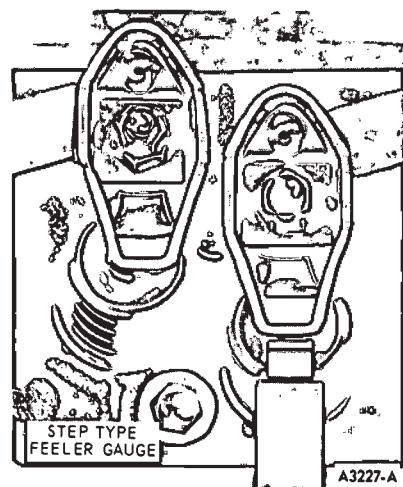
Valve Lash Adjustment—Mechanical Tappet
